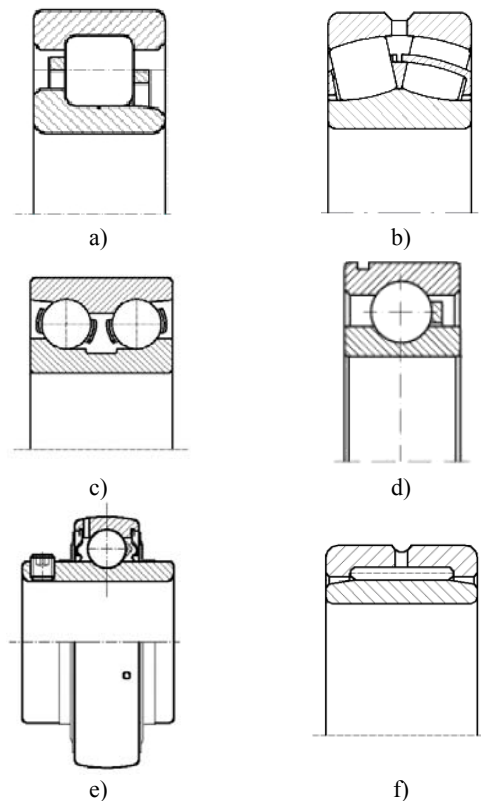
Representative products for formed groups of rolling bearings: a) Cylindrical roller, b) Spherical roller, c) Double row ball, d) Single row deep groove ball and Single row angular contact ball, e) Single row angular contact ball with grub set screws, f) Needle roller bearings
